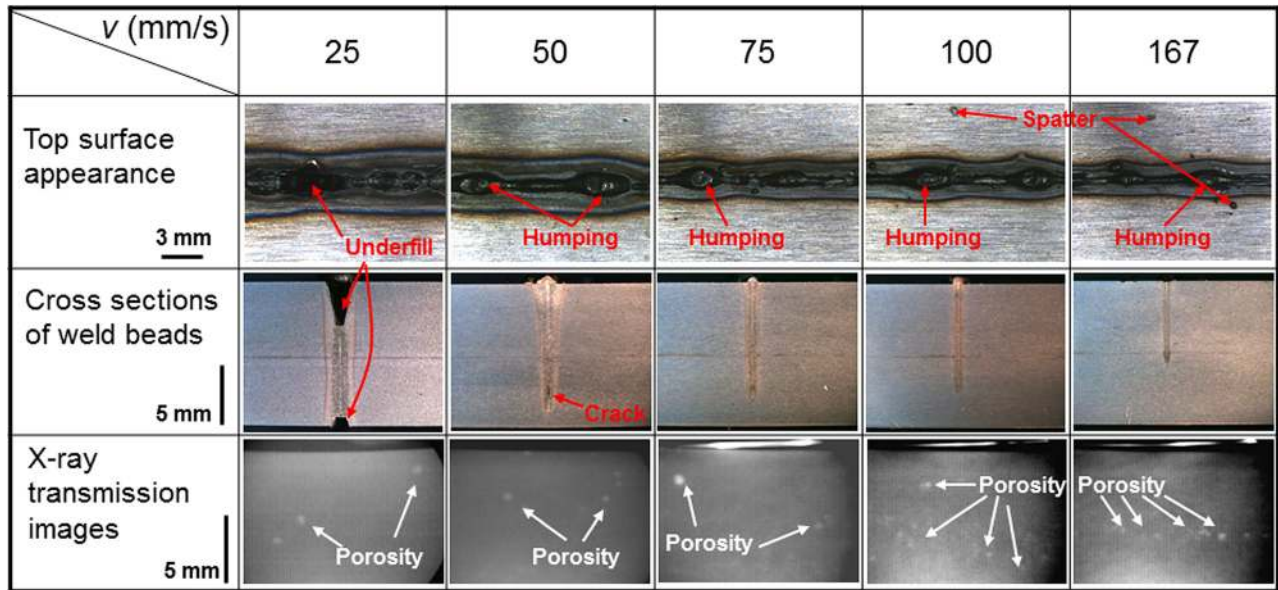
Top surface appearance, weld beads, and X-ray transmission analysis of cross sections for welds obtained by fiber laser welding of a high-strength steel with optics system A (2 mm focus depth).
